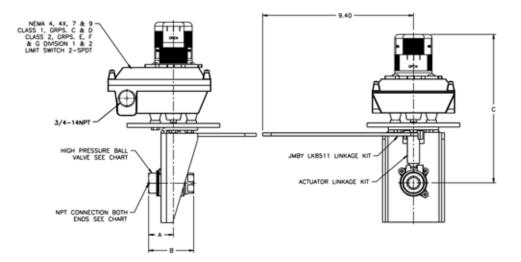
Lockout Valve with Explosion Proof Limit Switches
